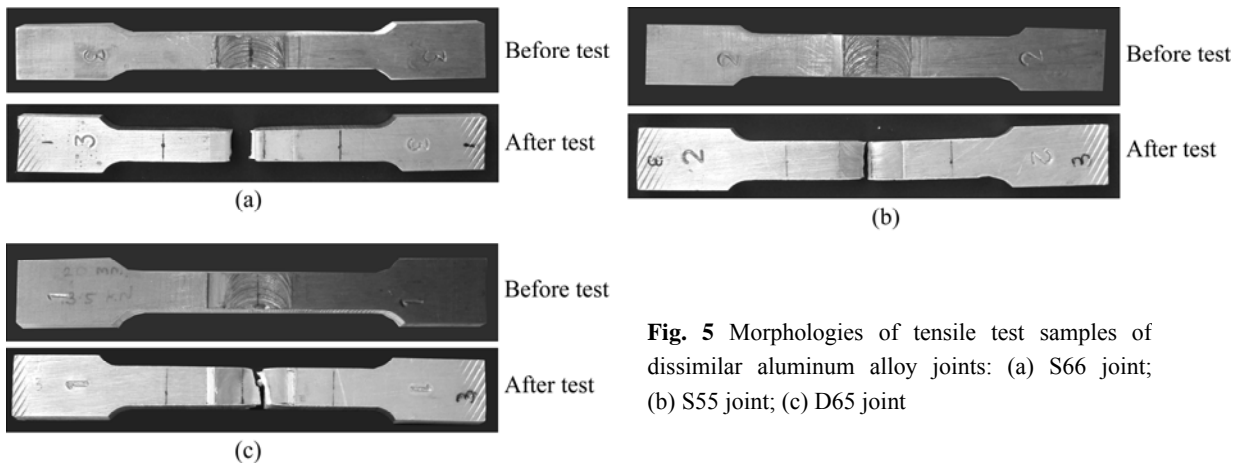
Morphologies of tensile test samples of dissimilar aluminum alloy joints: (a) S66 joint; (b) S55 joint; (c) D65 joint
